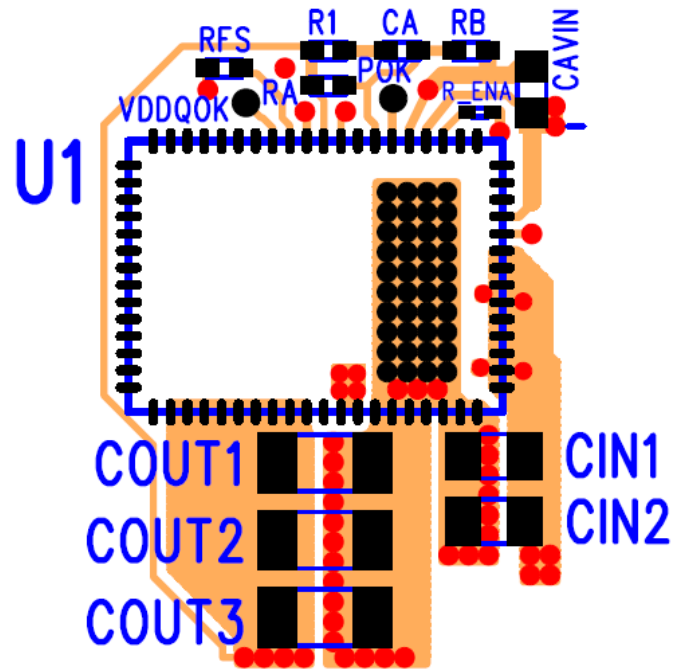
Top PCB Layer with Critical Components and Copper for Minimum Footprint (Top View)
